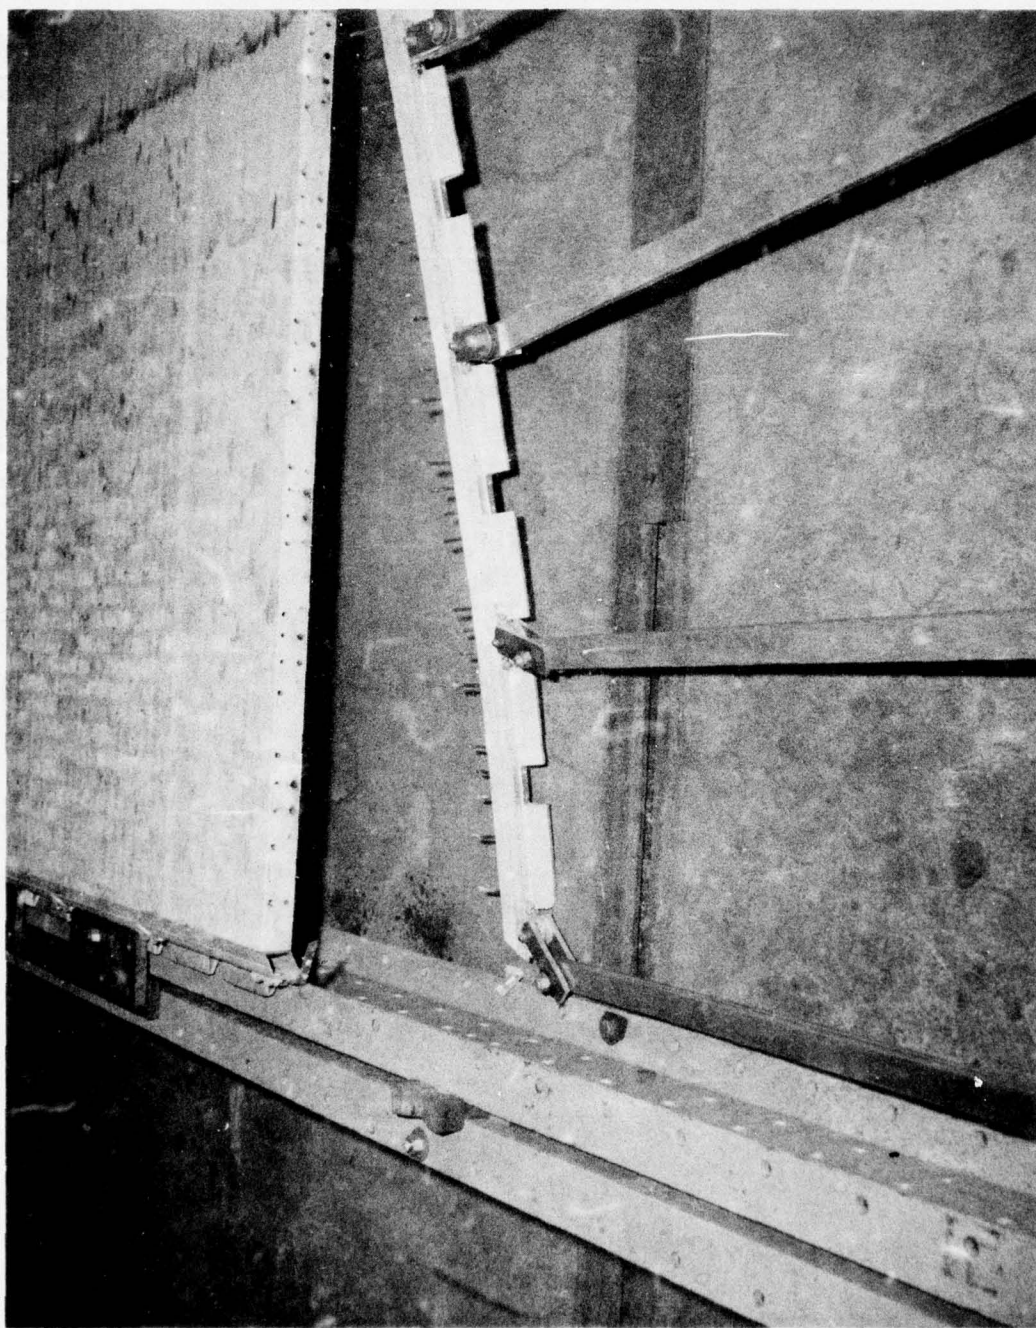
RAIL STRENGTH TEST - BOLT PULLOUT 88 INCH EDGE - OVERALL VIEW
